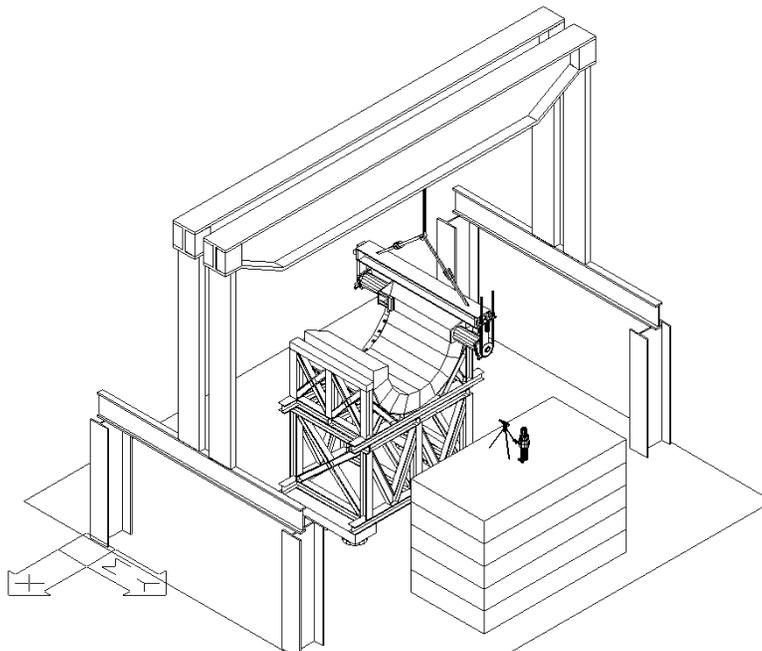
CMS HCAL barrel assembly / installation step 4.
